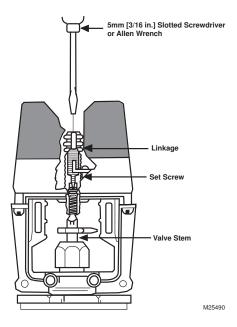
Locking MLx984A Drive Shaft to Valve Stem.
